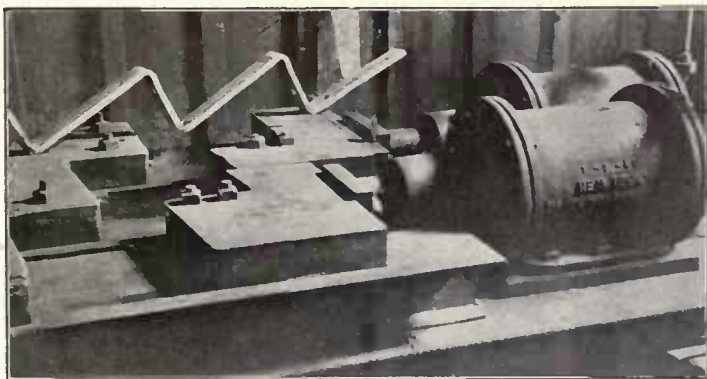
Bulldozer and Dies for Bending Caboose Steps.
